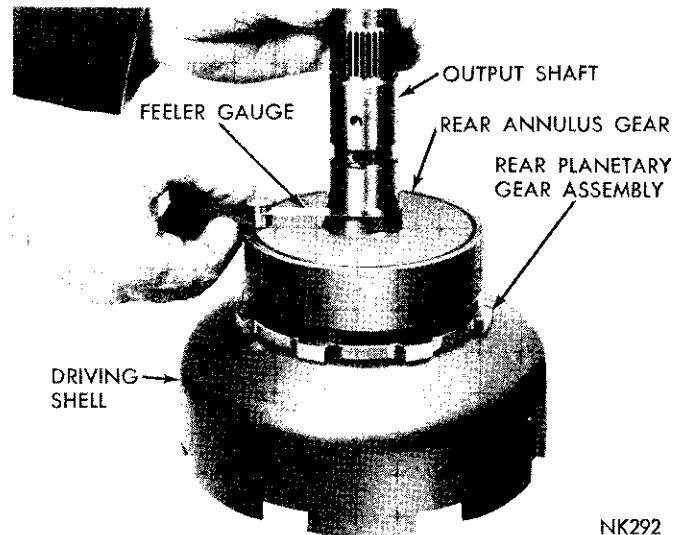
Measuring End Play of Planetary Gear Assemblies
